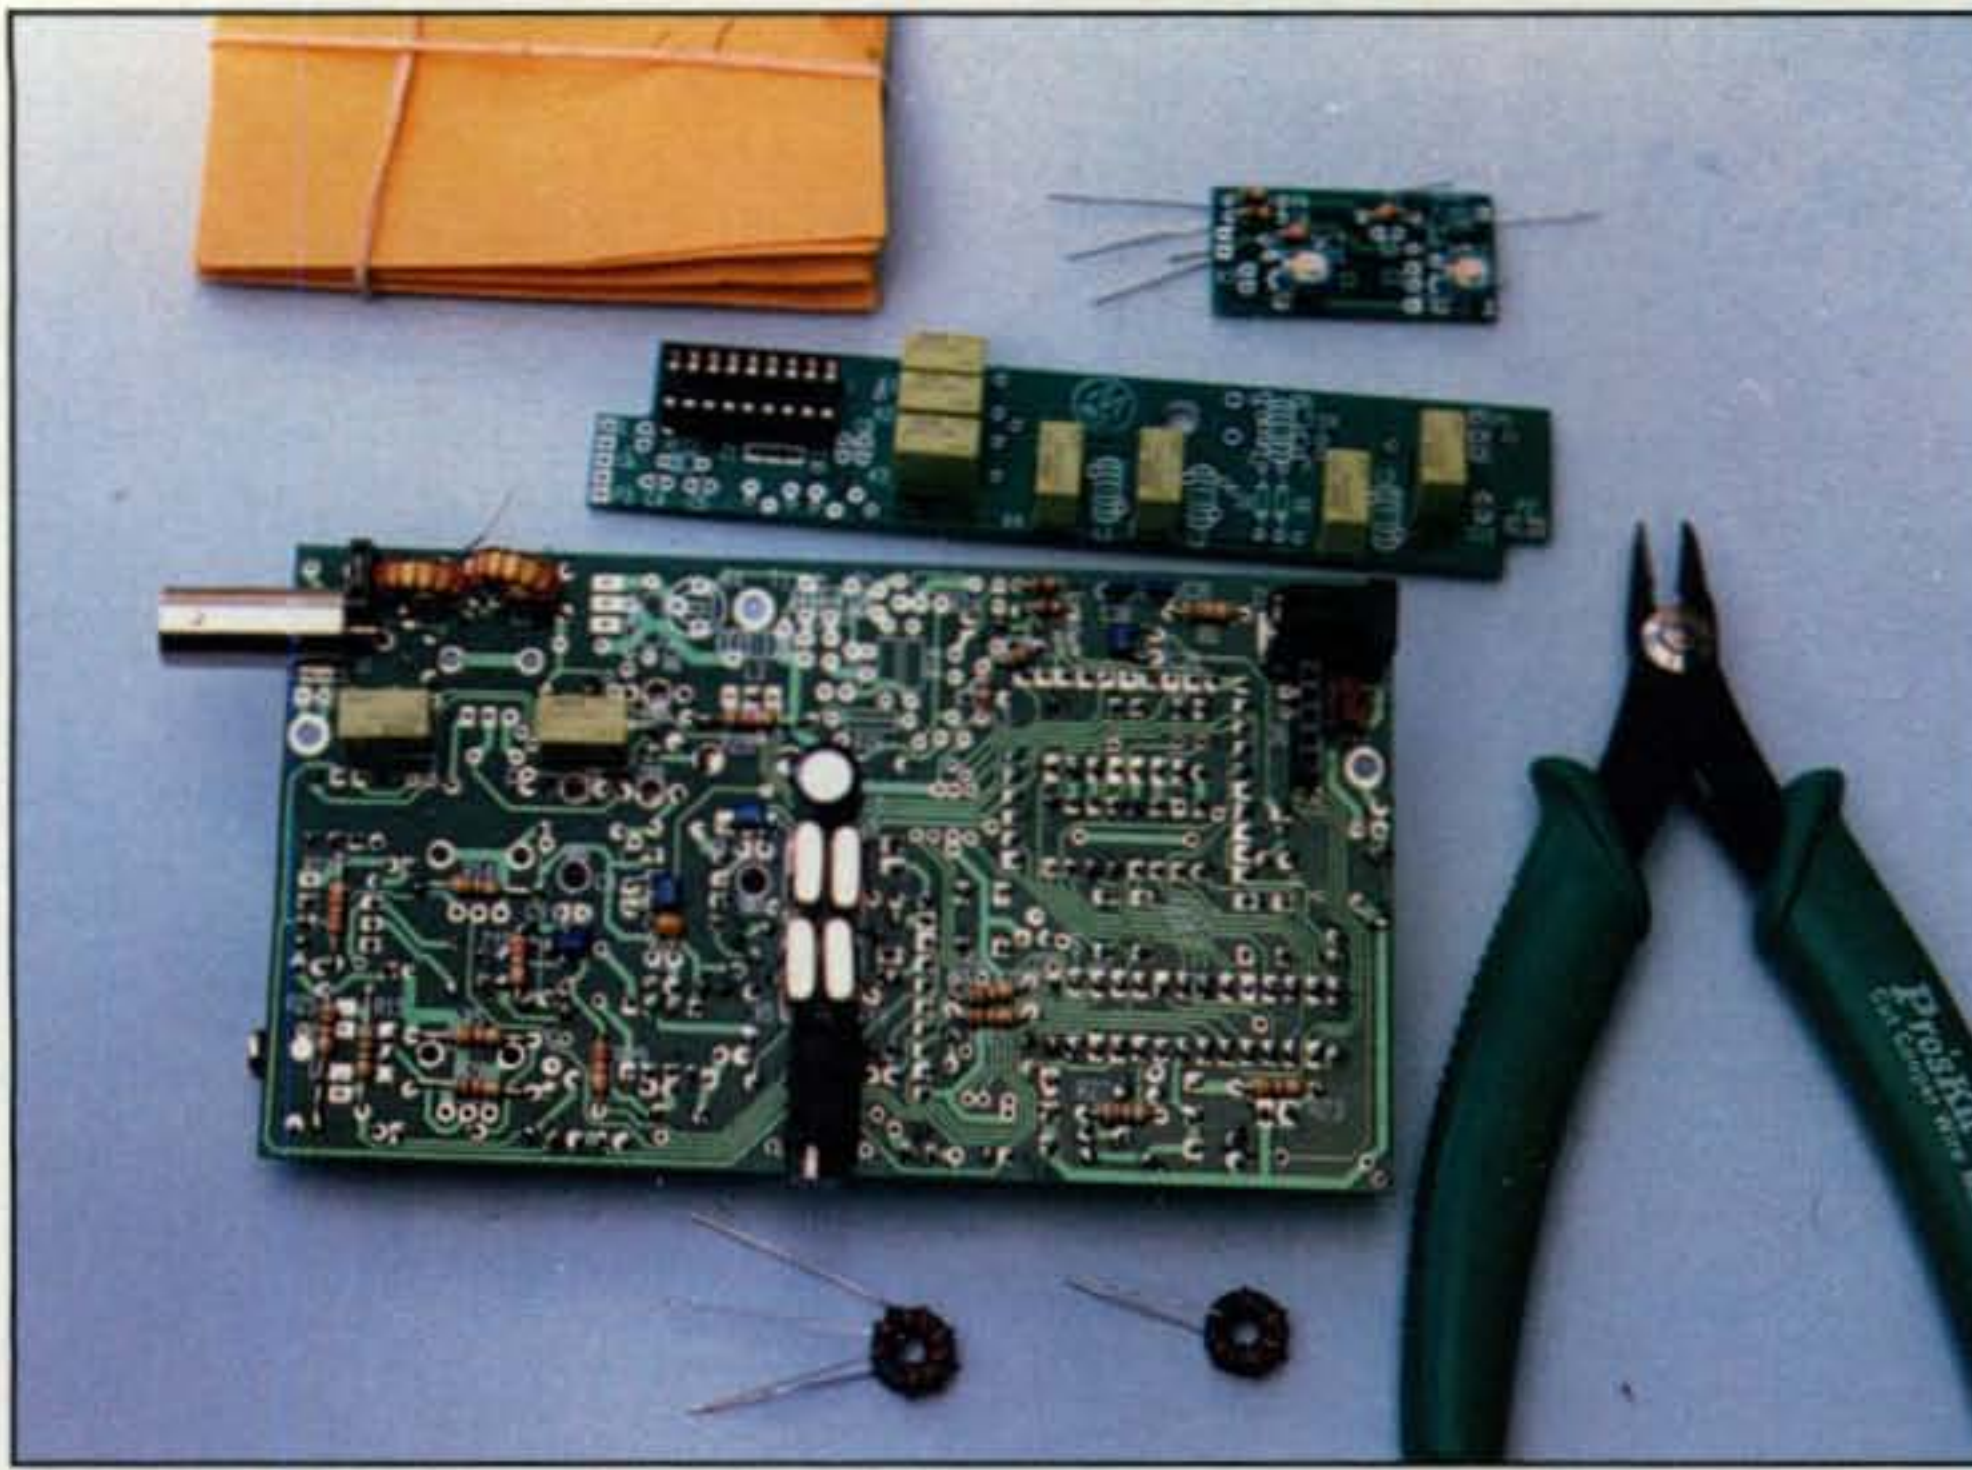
This “reverse view” shows how small parts mount on both sides of the main PC board. The receiver has now been assembled, and the transmitter section is half completed. Assembly has also begun on the optional automatic antenna tuner (long, narrow board) and 30-meter mod (small board). Two pre-wound toroids from AA3WF have been installed, two are ready to be installed, and four for the tuner are in envelopes.
